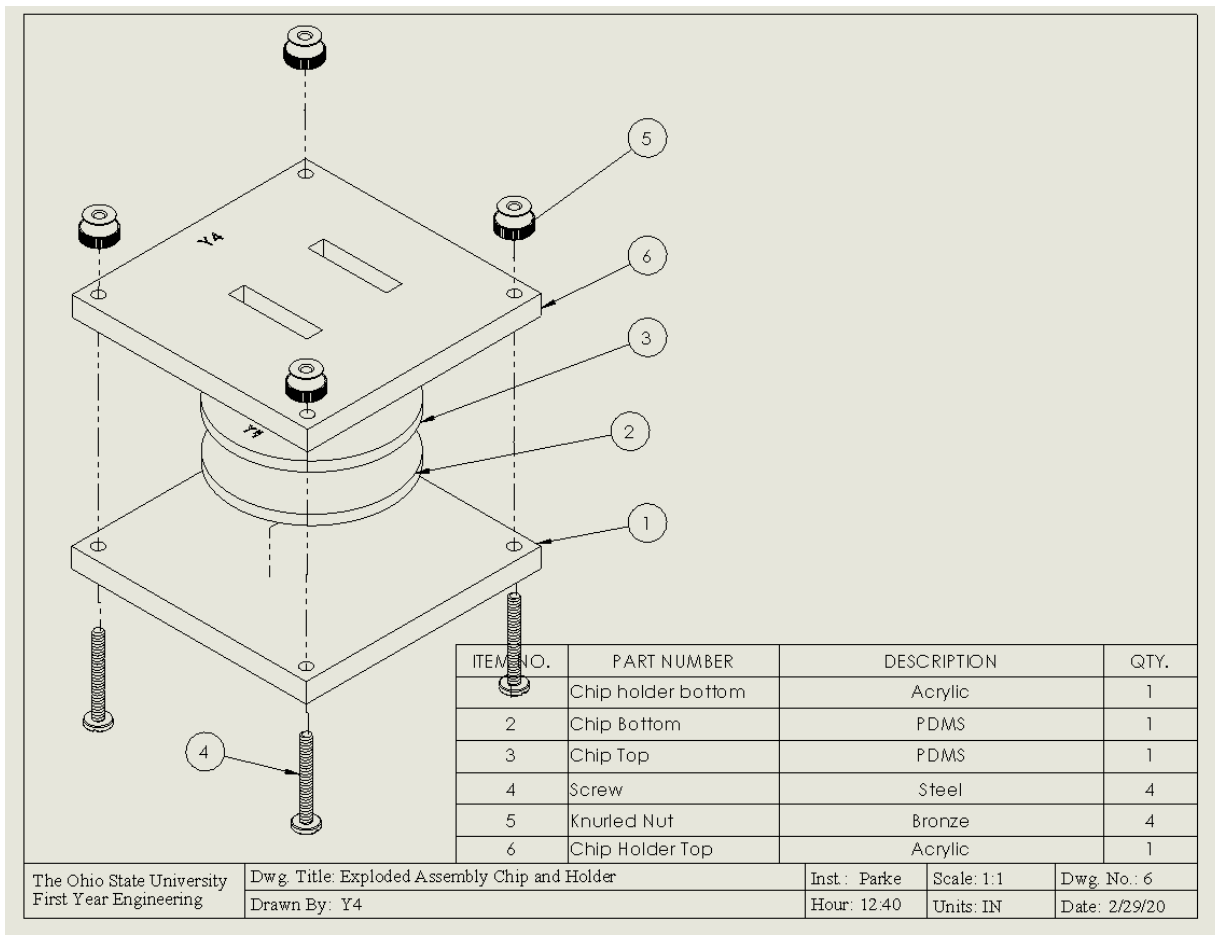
SOLIDWORKS Drawings for the microchip assembly. Screws, bolts, and all chip parts are included in this assembly.
